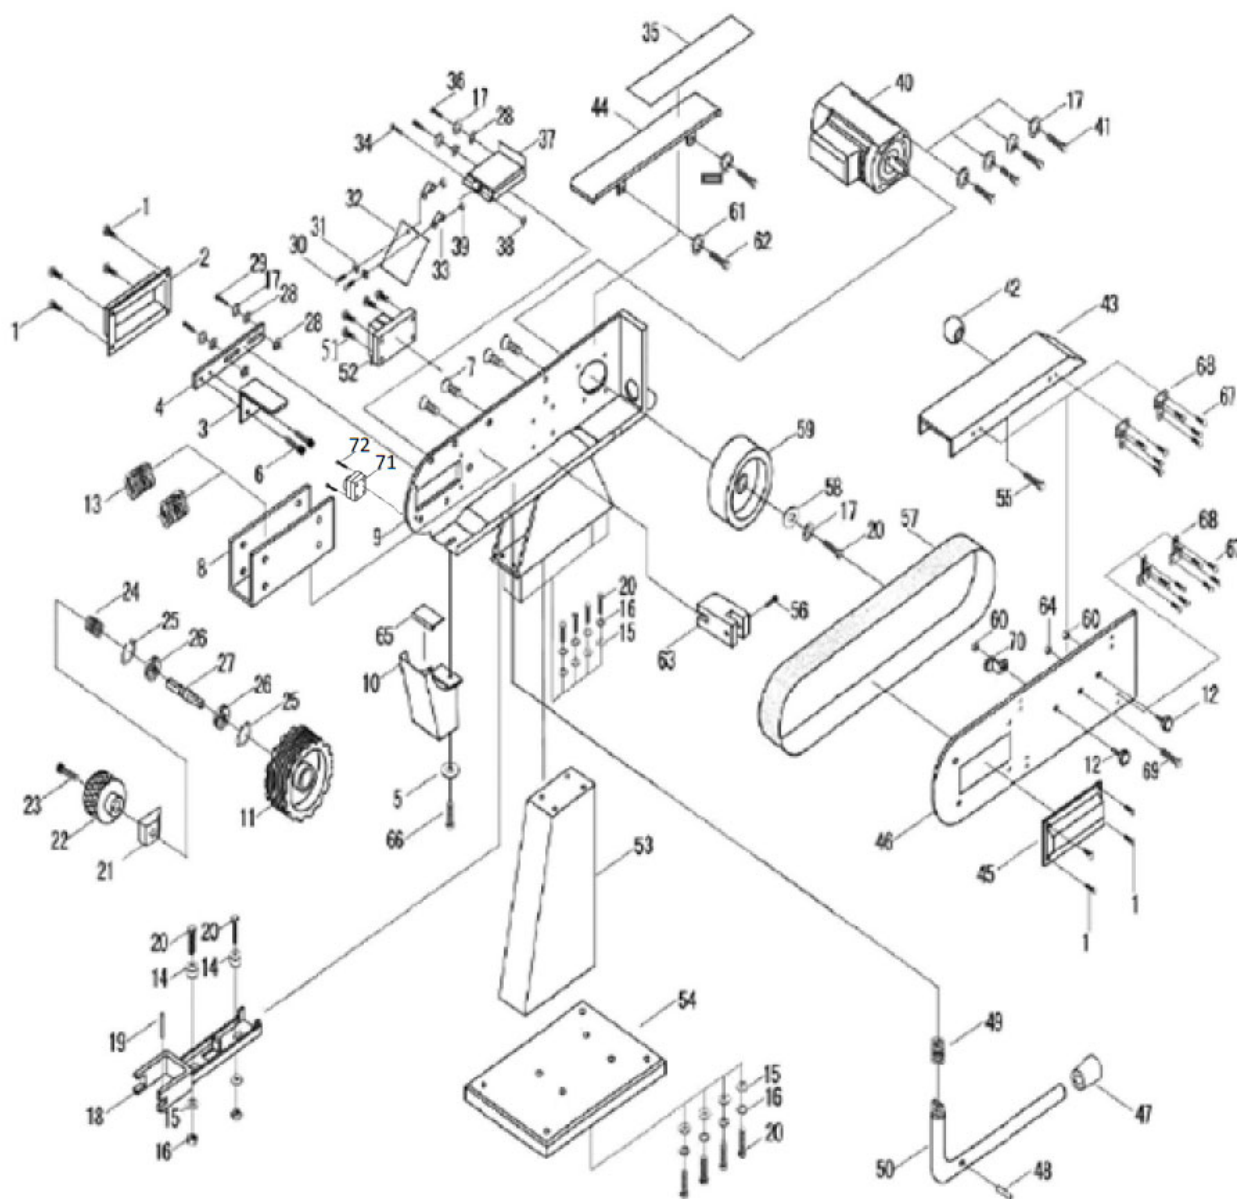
Spare parts drawing 1 MBSM 100-130 and MBSM 100-130-2
